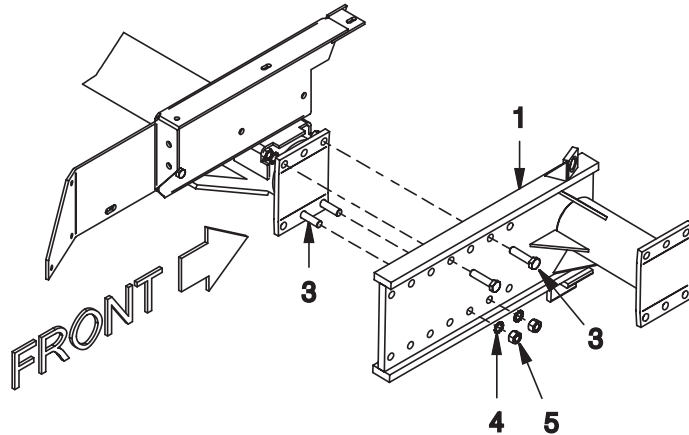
Place Spacer and Tandem Wheel Plate
